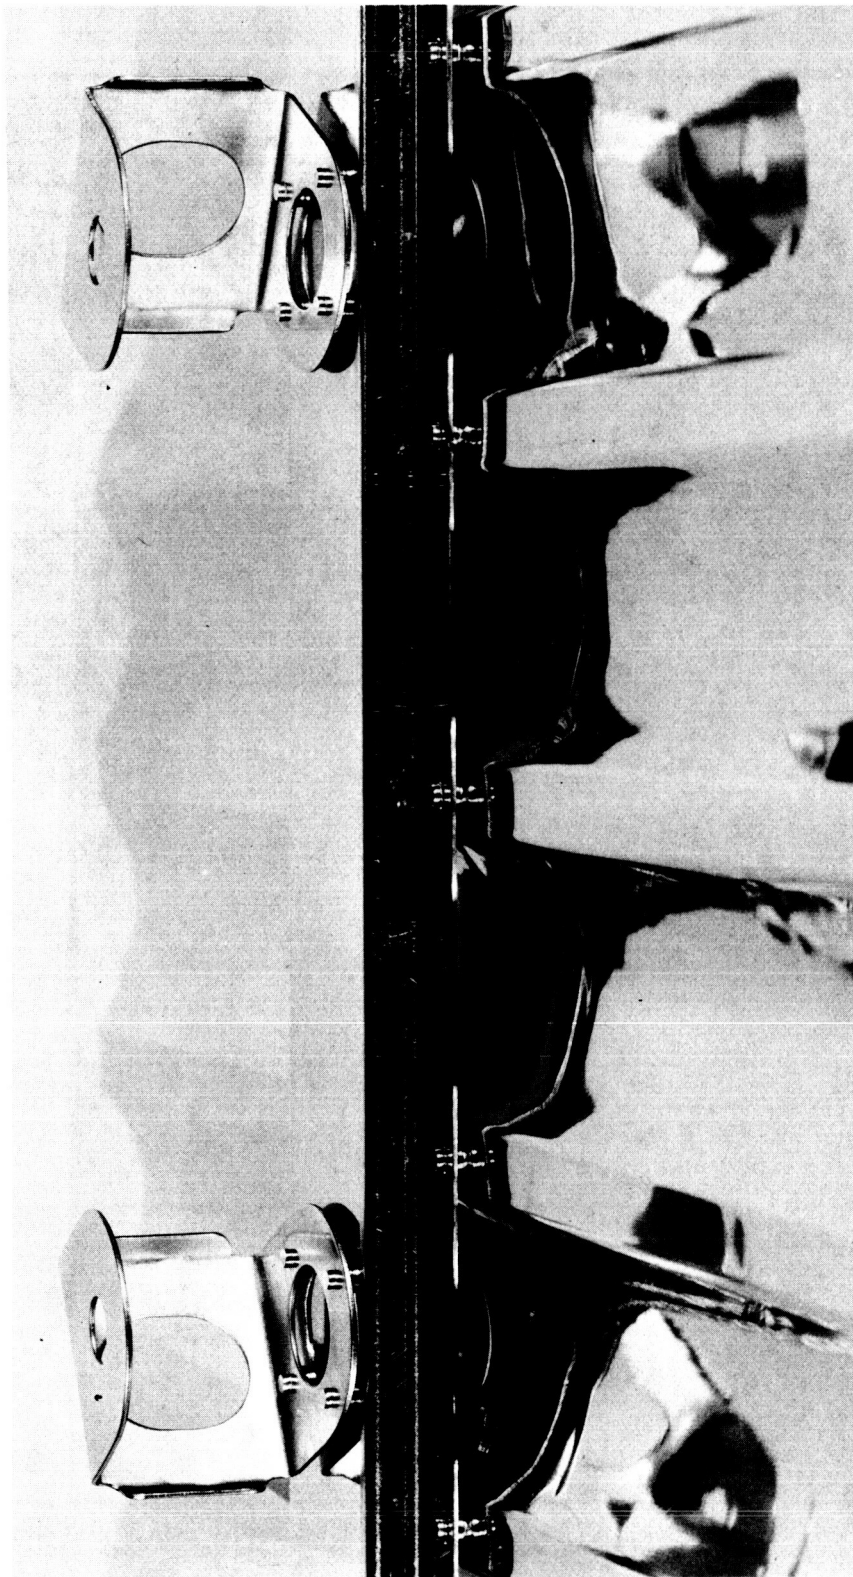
Ta-10W heat shield with riveted joints before coating.
